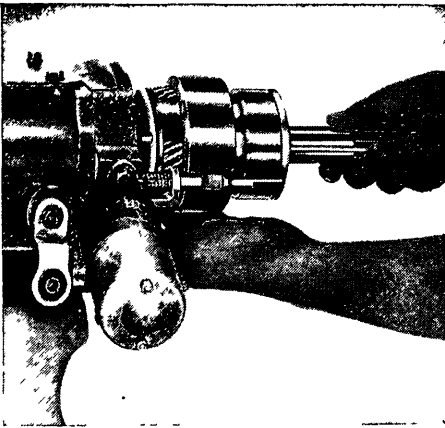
Hold the adapter plate to the transmission case with one screw and remove the overdrive shaft, catching the free wheel unit as shown. Removing snap ring permits ring gear to be taken off shaft
